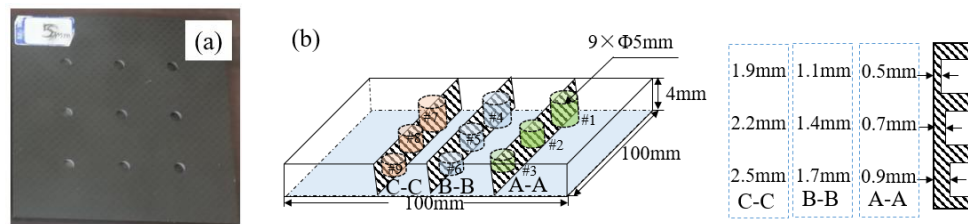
a) Optical photo of the #ES2 CFRP specimens and b) its geometric dimensions
